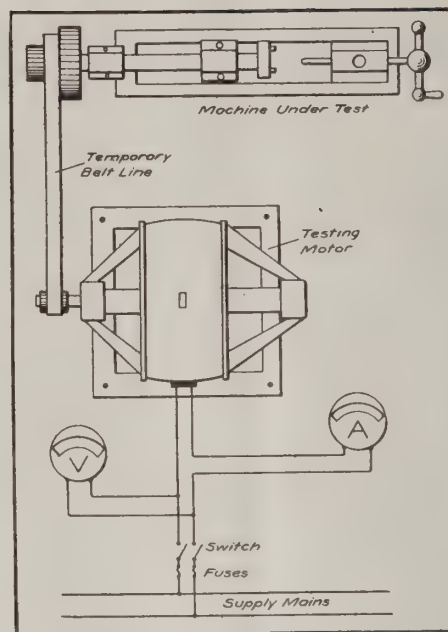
CONNECTIONS OF APPARATUS FOR TESTING POWER INPUT TO MACHINE TOOLS.
